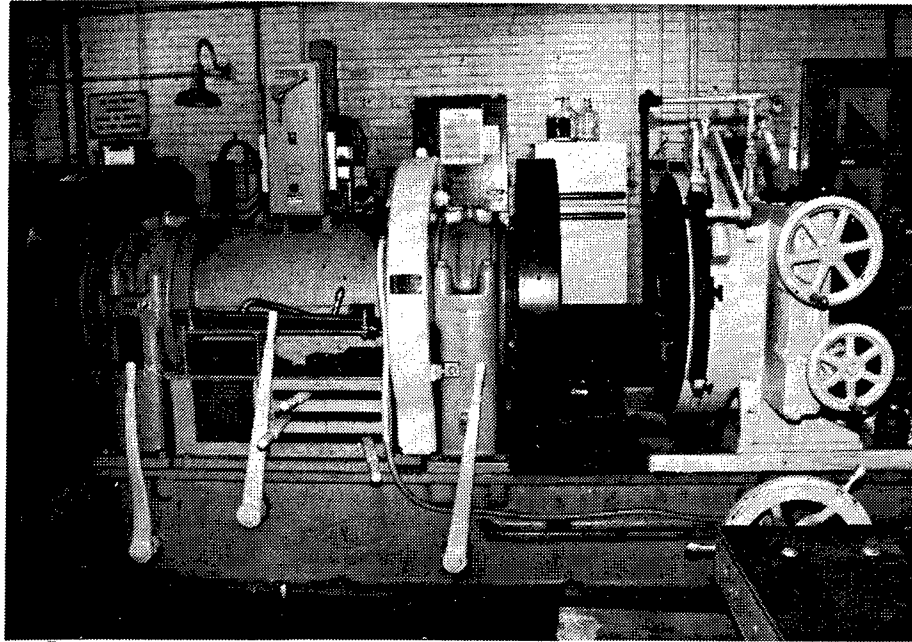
Building 500: A Landis pipe threading machine for six- to twelve-inch pipe, located in the Pipe Shop.
